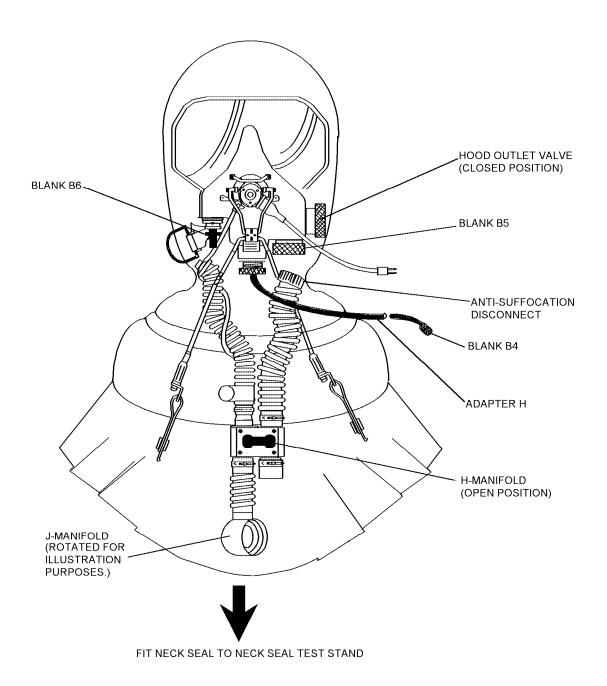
(V)1 Variant - Non-Oxygen Hood Assembly - Overall Leakage Test
